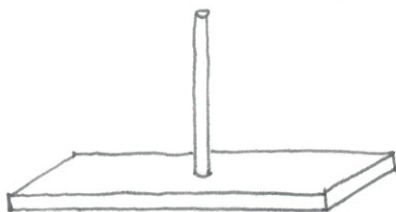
First connection involving flat glass, 5mm rod attachment. - As welding or heat bonding flat glass is uncommon in the typical scientific glass blowing craft, thin solid rods were used to initially verify the suitability of the flat glass specimens for heat bonded connections. Due to the small diameter of the rod ($D=5\text{mm}$) it was assumed, that it would prove difficult to verify the strength of the connection through fracture mechanical testing.
